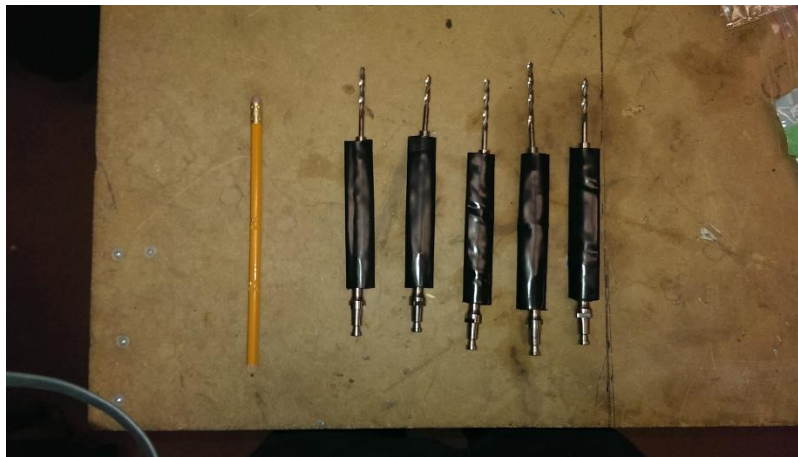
Flexible drill bit with unshrunk heat shrink tubing
